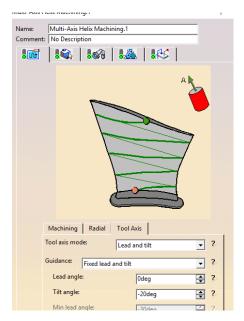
Tool axis on strategy page of CAM setting of multi axis helix machining operation
